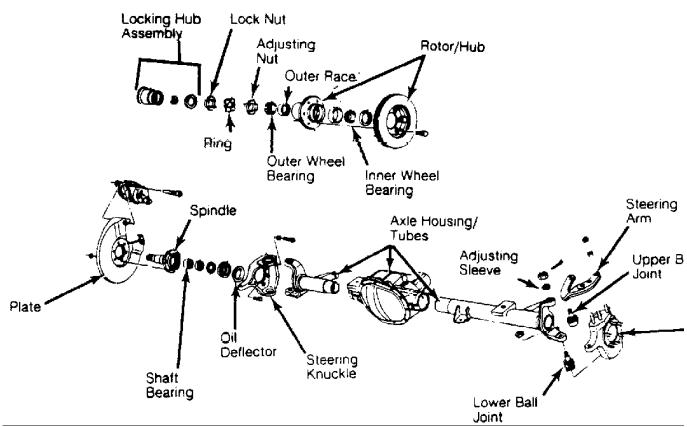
Exploded View of Ball Joint Type Steering Knuckle Assembly
